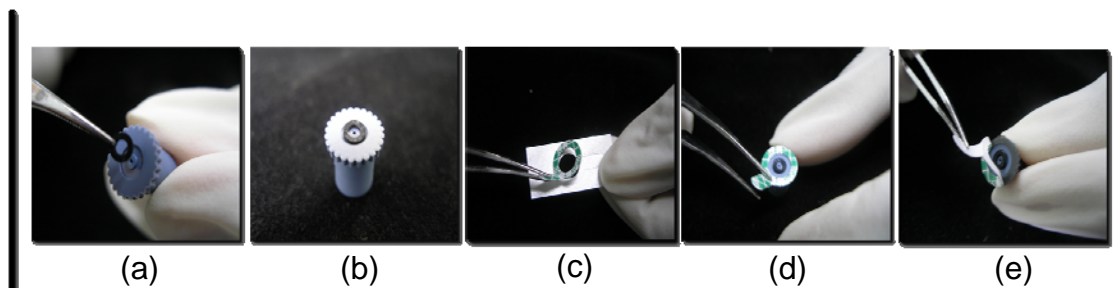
Coned port installation steps: (a) Insert gasket seal into recess at bottom of coned port (b) Press down to make sure gasket is snug in place (c) Remove one side of adhesive backing with tweezers (d) Center and place open adhesive side of ring to bottom of port (e) Ensure good contact has been made with base of port by applying light pressure around circumference and remove adhesive backing
